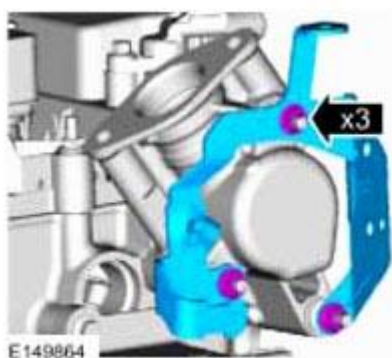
Locating Fuel Injection Pump Bracket Nuts
